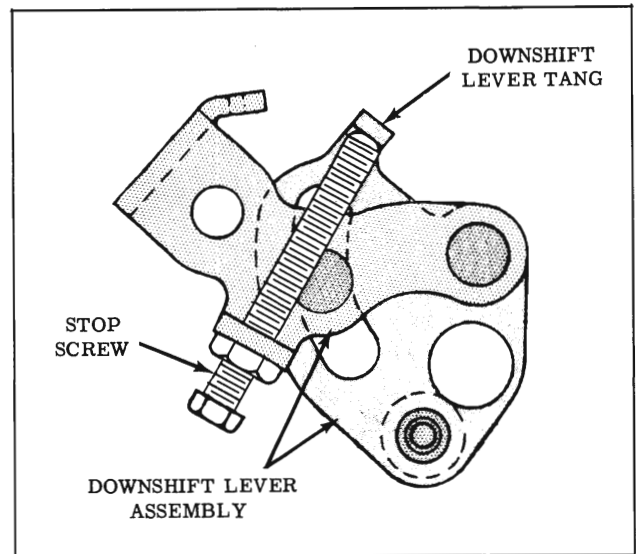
Throttle Downshift Stop Screw Adjustment
